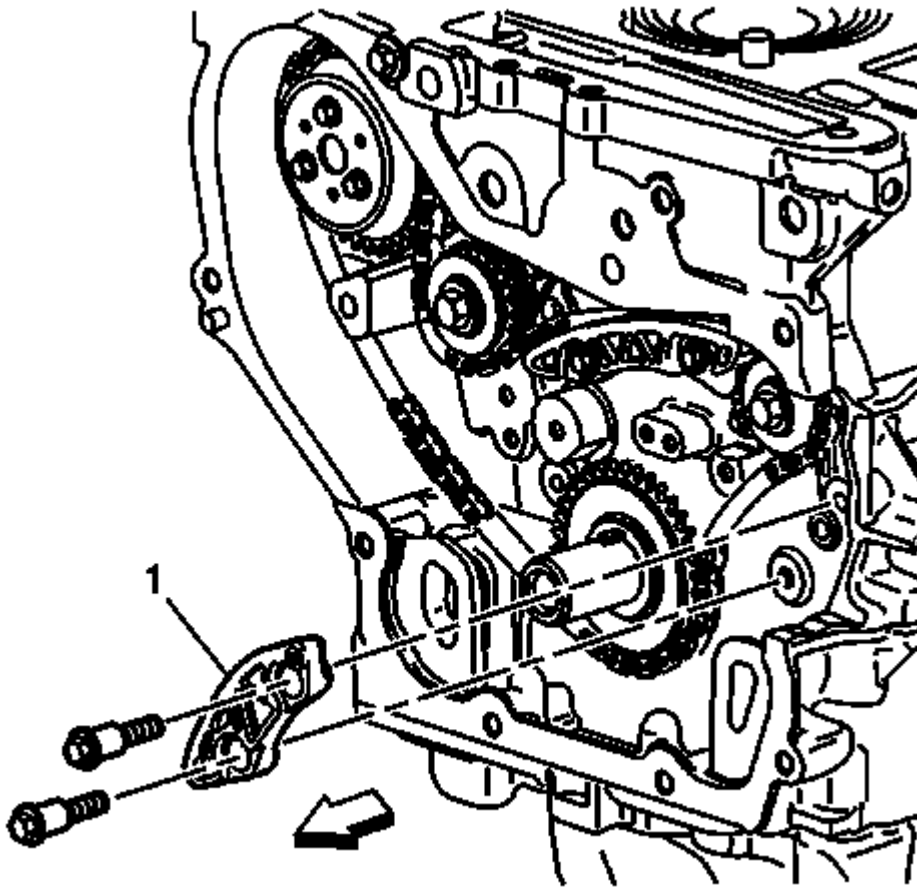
Crankshaft And Crankshaft Front Oil Seal
